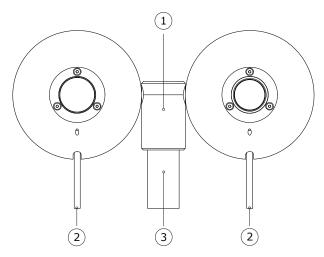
Top view of RA01: (1) levelling assembly for x- and y-axis, (2) cables, (3) mounting tube (not included).
